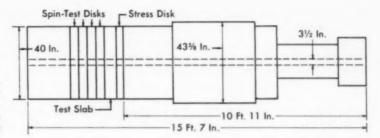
Outline Drawing of 25-Ton Rotor Forging With Prolongation for Test Disks and Other Specimens
